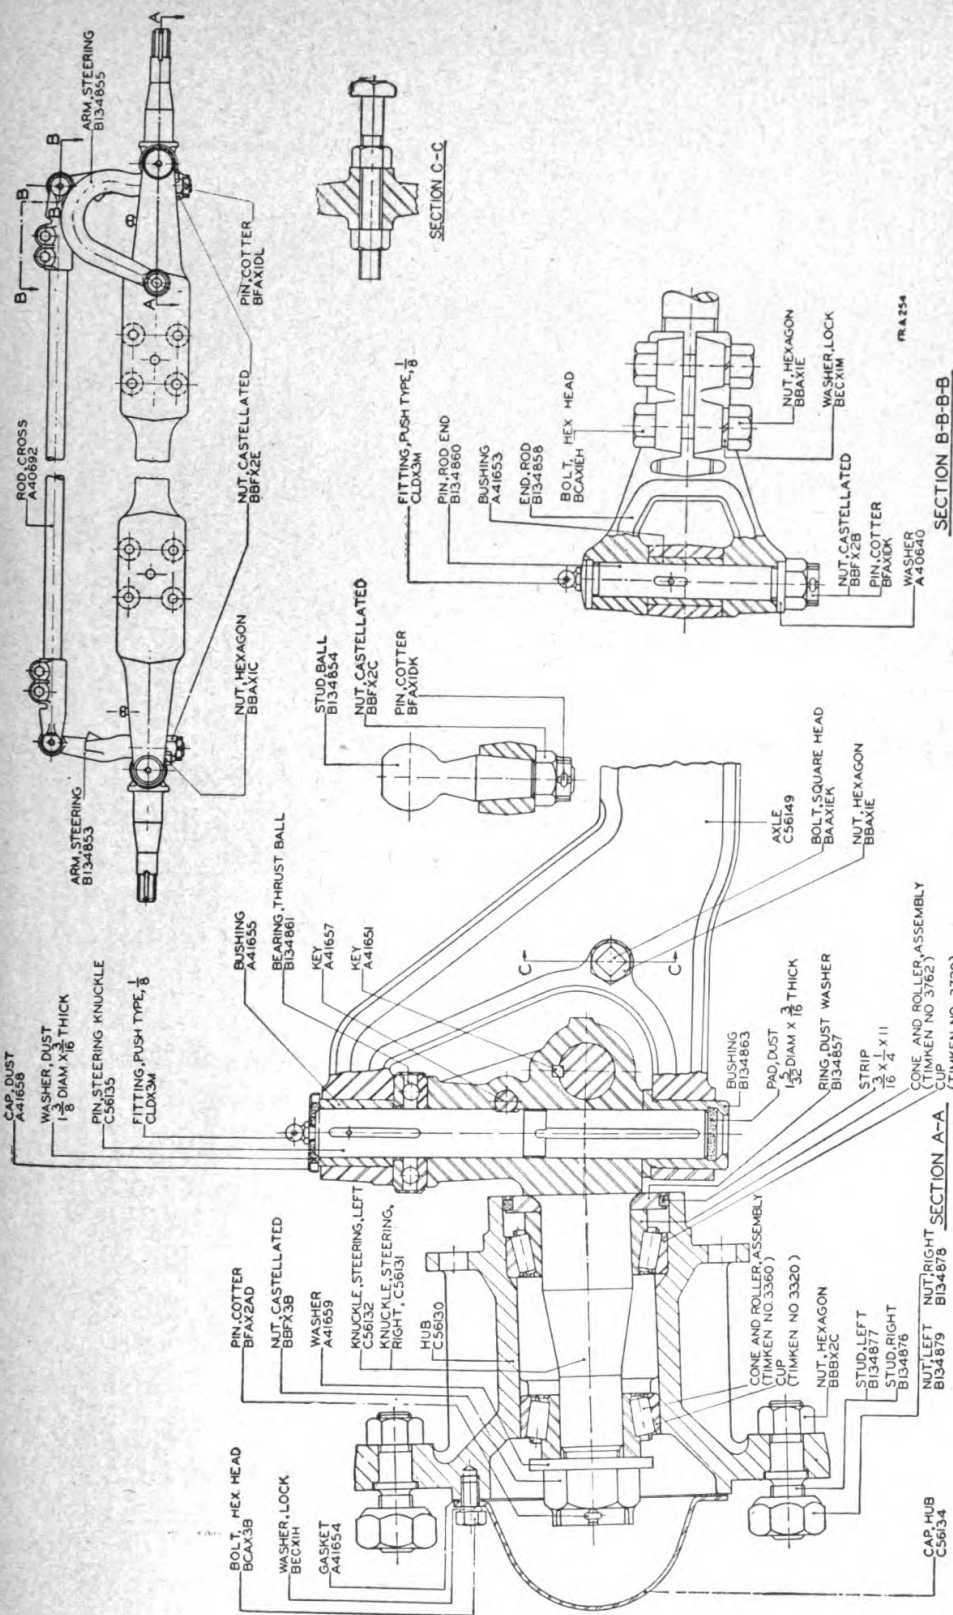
Sound locator trailer, M2A3 and M2A4—front axle—assembly and sectioned views.
